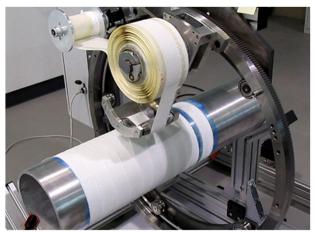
Metal-CMC Hybrid tube manufactured by the automated tape-winding process.
